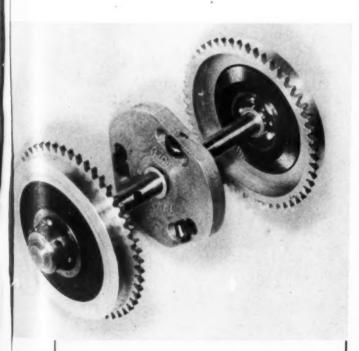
Exploded view of a light-duty compact differential employing three spider gears to augment bearing stability
